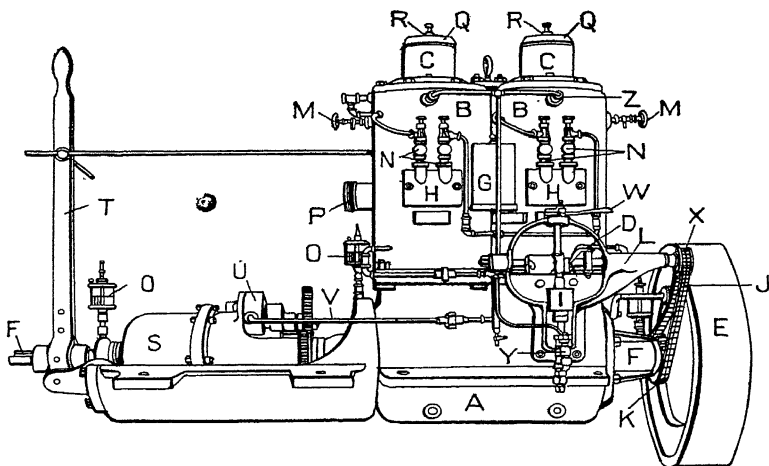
MEITZ AND WEISS ENGINE; Starboard Side.
